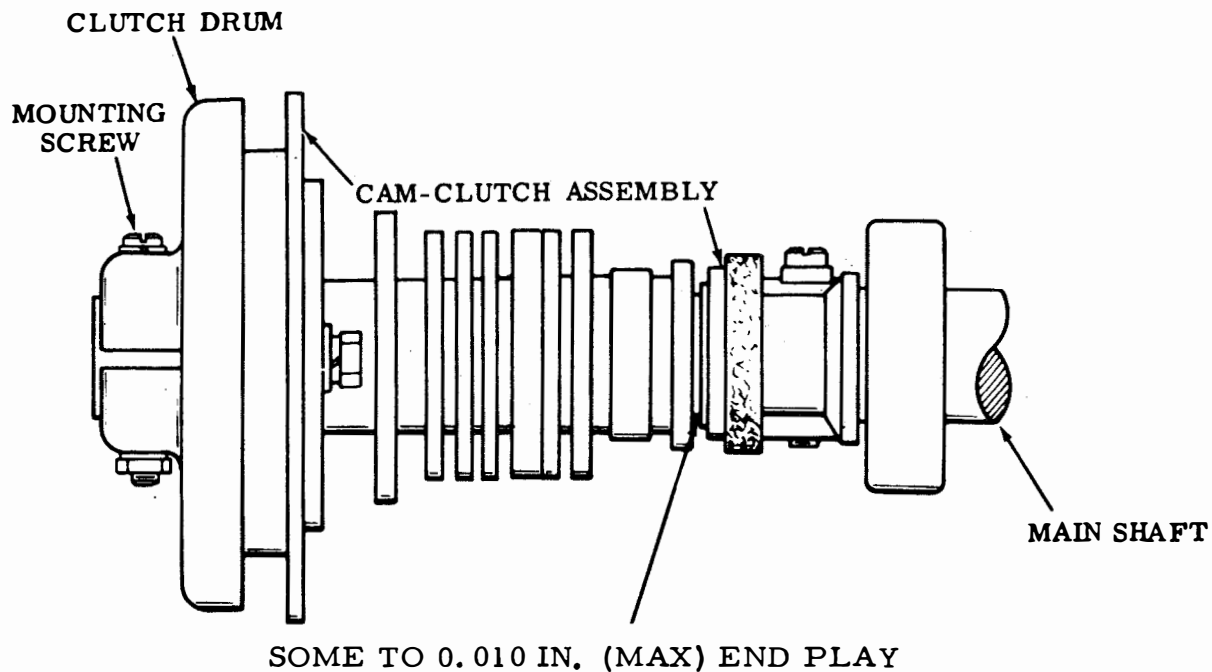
Selector Clutch Drum End Play, Right Side View
